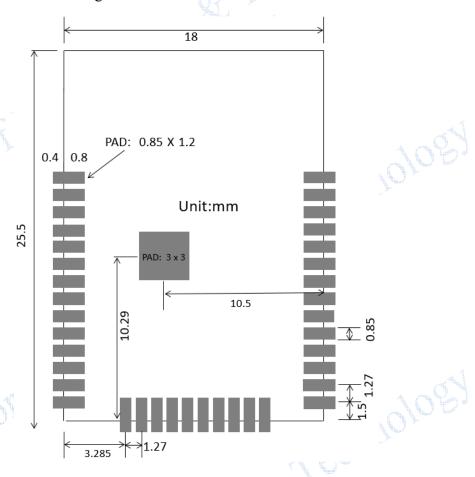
PCB Layout for ESP-WROOM-32E
